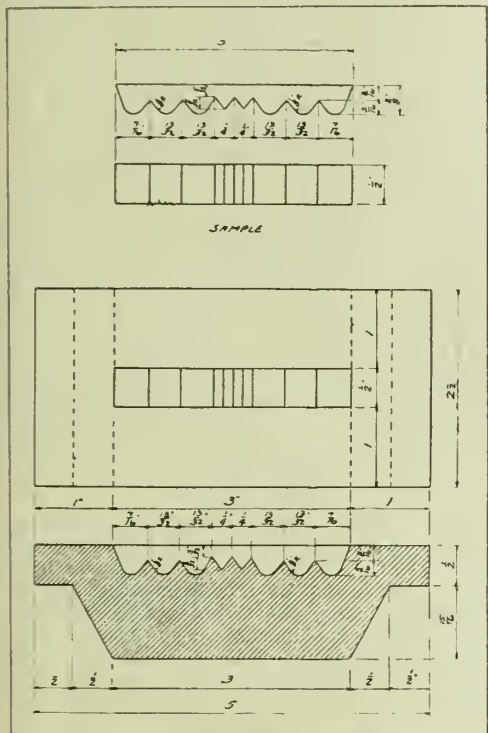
TEST PIECE AND MOULD FOR SAMPLING MOLTEN PIG-IRON FOR CHEMICAL ANALYSIS.
